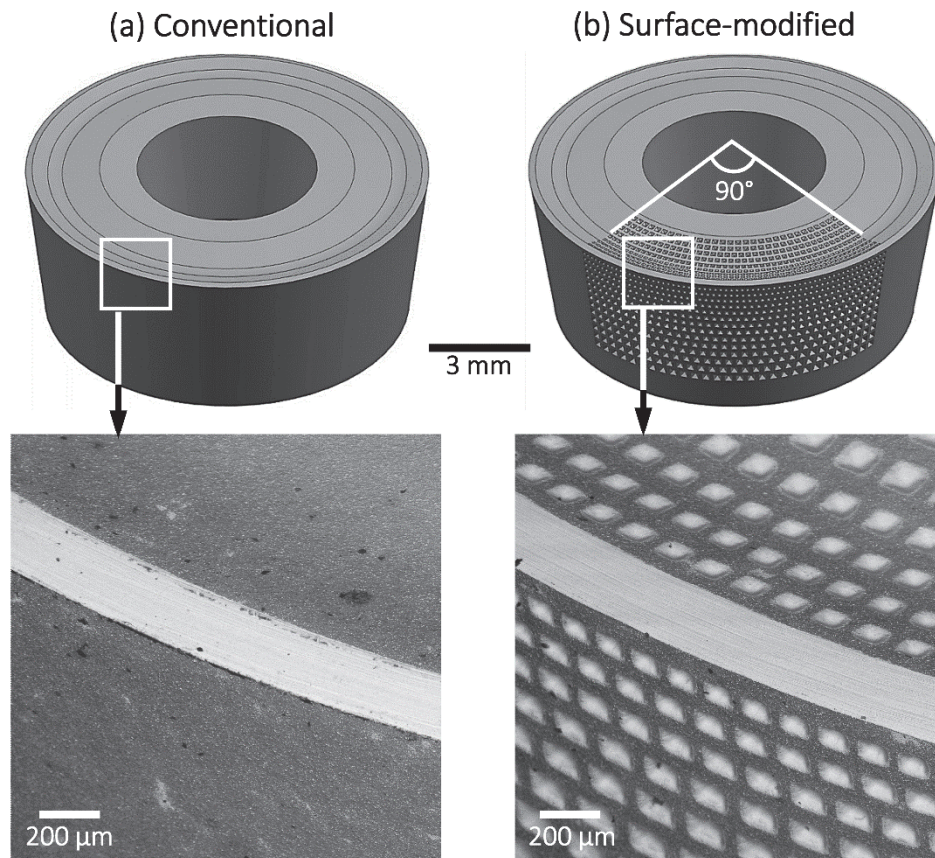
Illustrations of the tools and SEM micrographs of the cutting edges: (a) conventional tool; (b) surface-modified tool.
